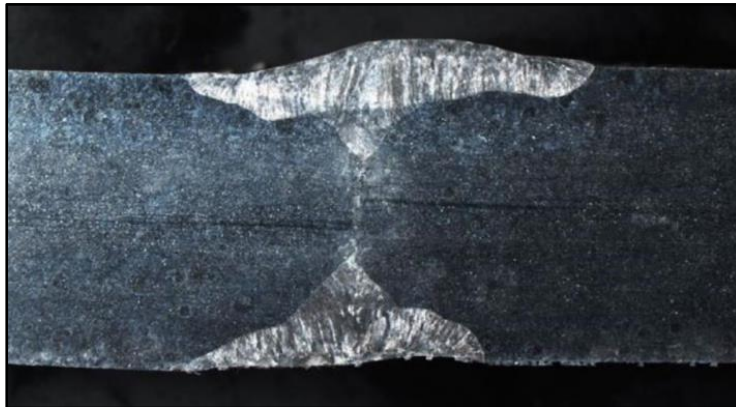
Macrostructure of the plate welded with 200 A.
